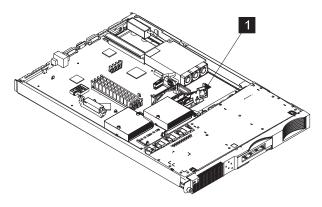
Removing a SAN Volume Controller 2145-4F2 disk drive fan
